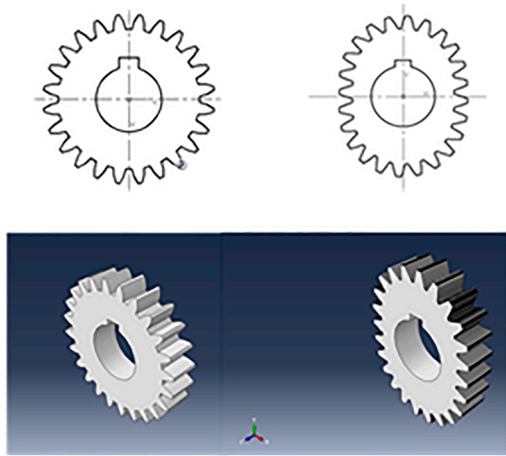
2D and 3D design of spur gear and elliptical gear.
